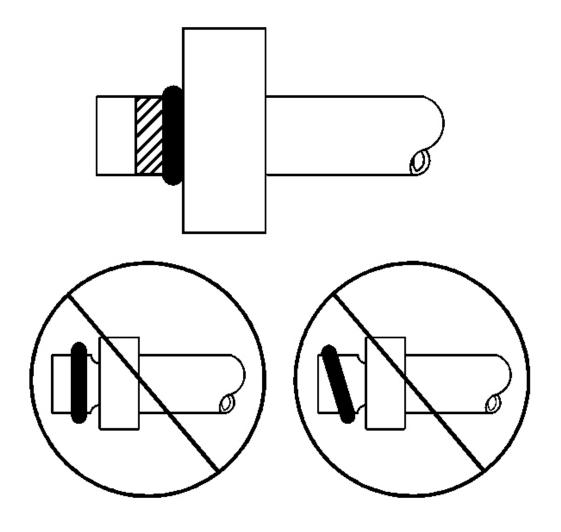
Identifying Proper Seating Of A/C Refrigerant O-Ring Courtesy of GENERAL MOTORS CORP.
